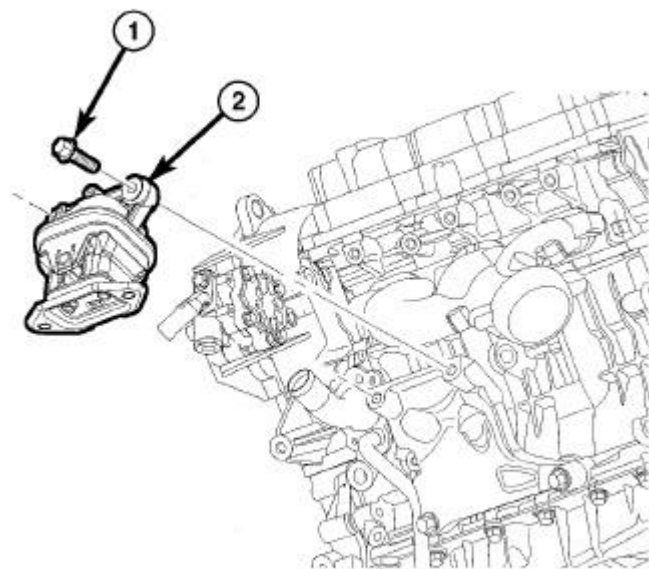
LEFT ENGINE MOUNT HEAT SHIELD
